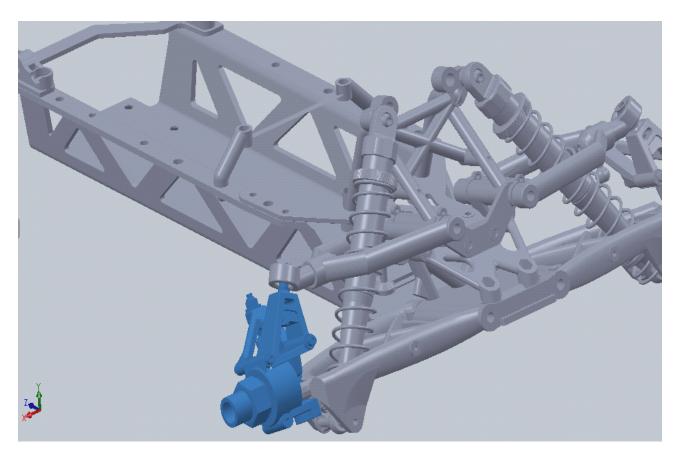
5. Front right hub assembly shown in blue as part of the complete vehicle assembly.
